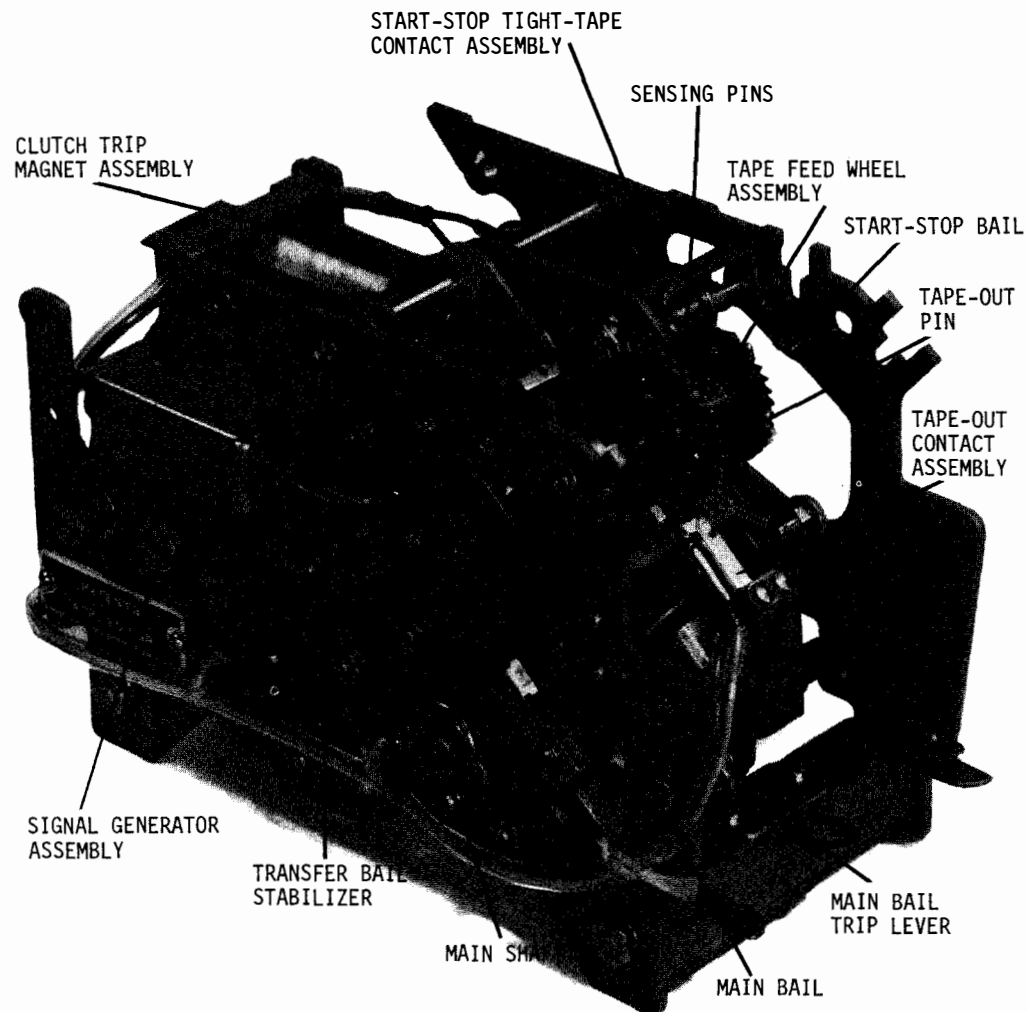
Transmitter Distributor Unit, Cover Plate, Top Plate, and Tape Guideplate Removed
